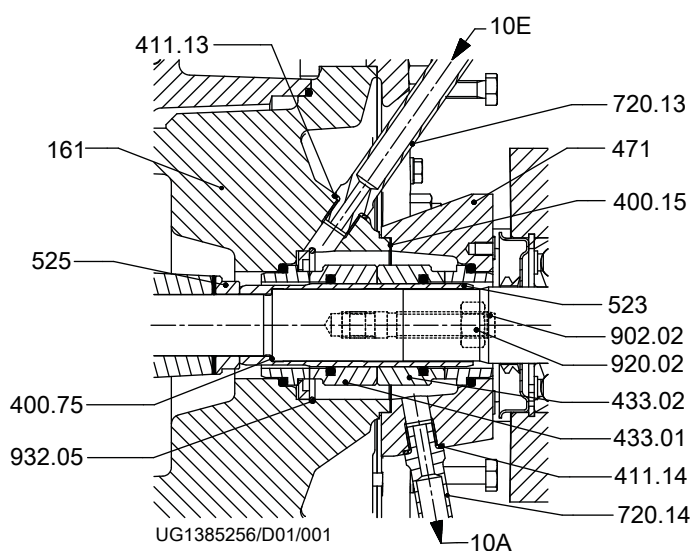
Model with double mechanical seal in back-to-back arrangement (SU 25/35)
